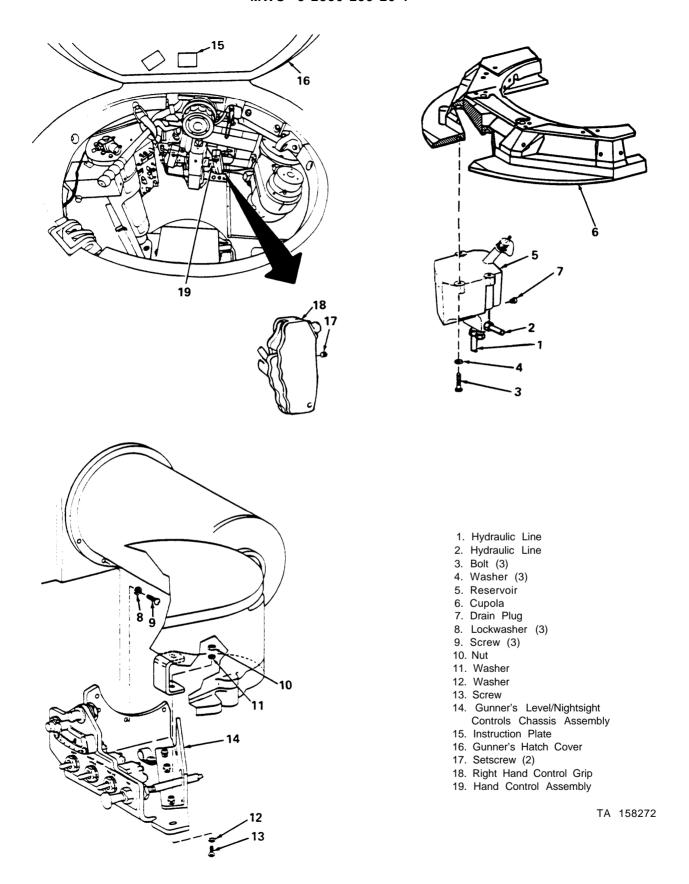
Installation of New Auxiliary Hydraulic Reservoir and Instruction Plate.
